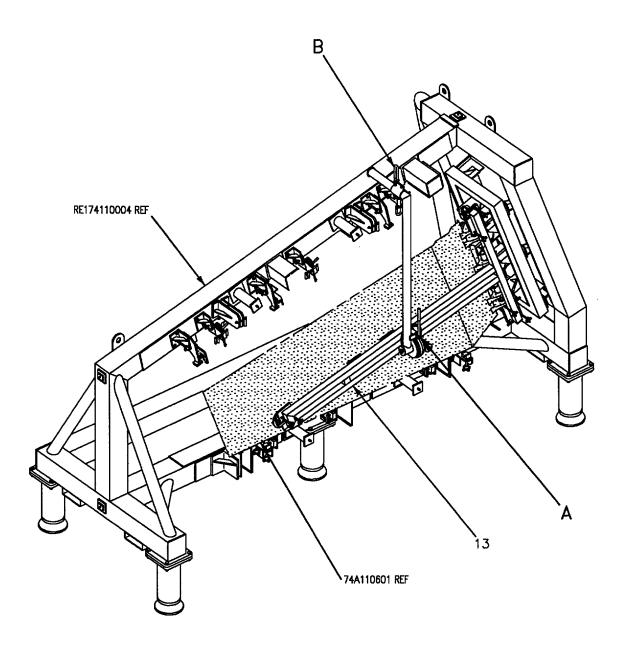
Loading Skin into RE174110004, Inner Wing Maintenance Fixture (Sheet 1)
